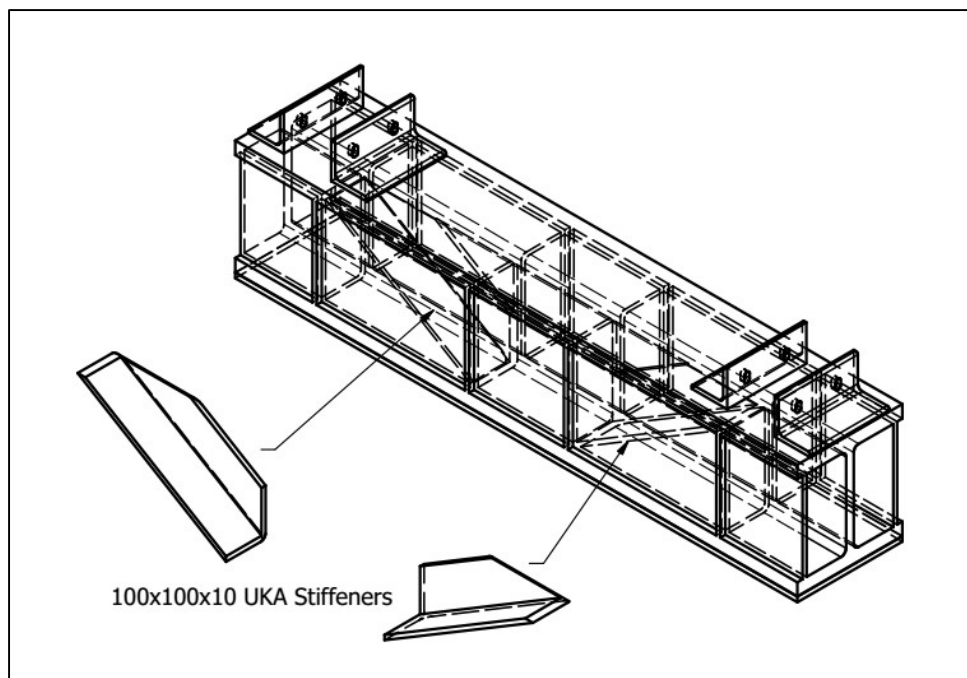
Part-exploded isometric view of crosshead showing internal stiffener locations
